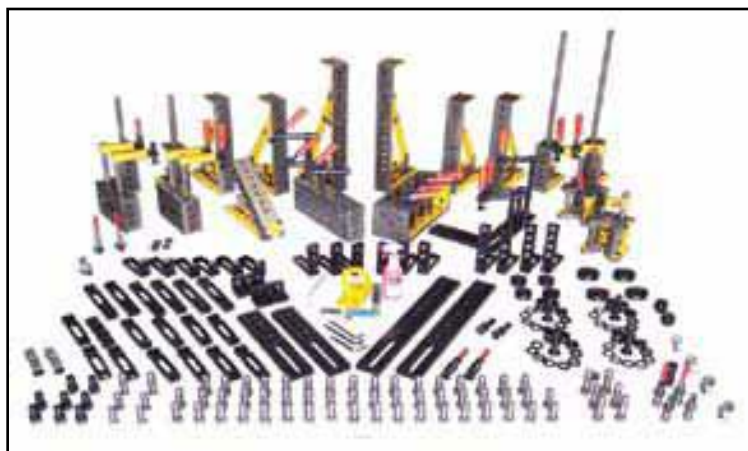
Bluco modular welding fixture components (Ellig, 2008).
